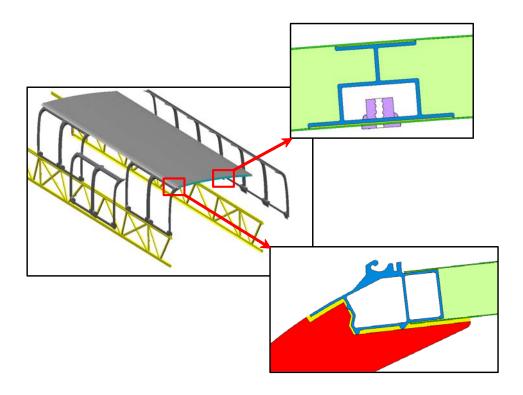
Proposed Lightweight Roof Design of Full-Length Sandwich Panel with Composite Window Posts or Modules
